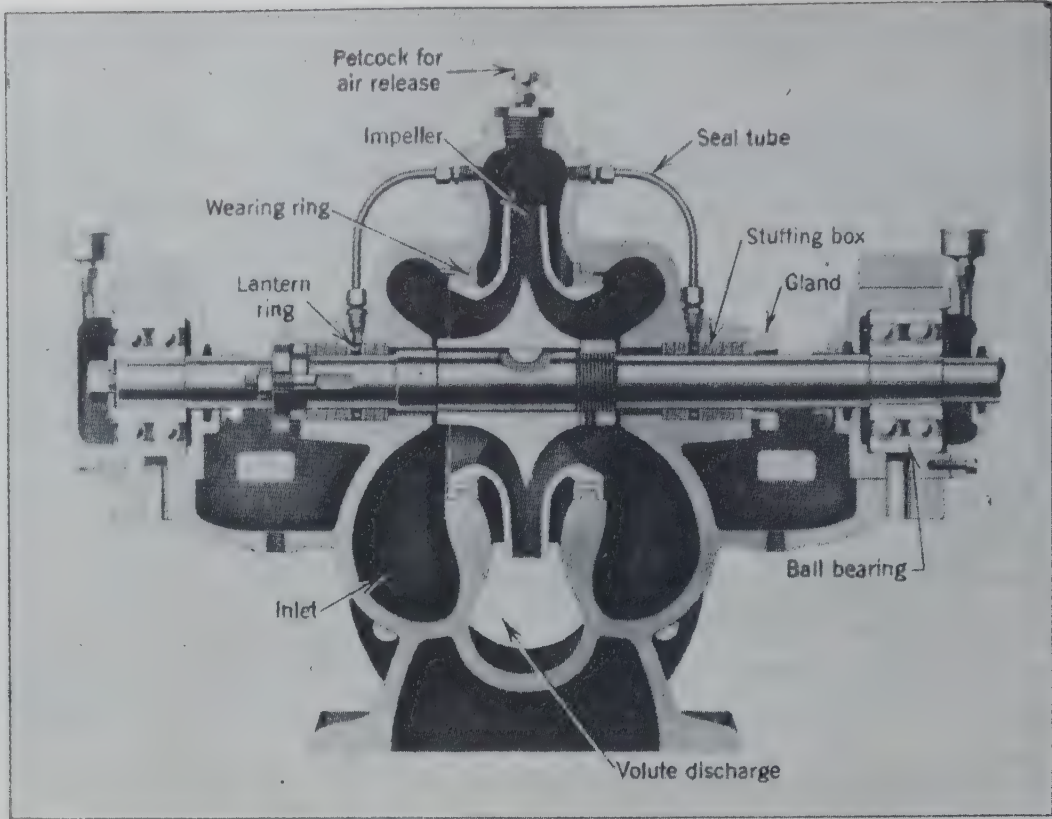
Cutaway view of double-suction centrifugal pump. (*Pennsylvania Pump and Compressor Co.*)
